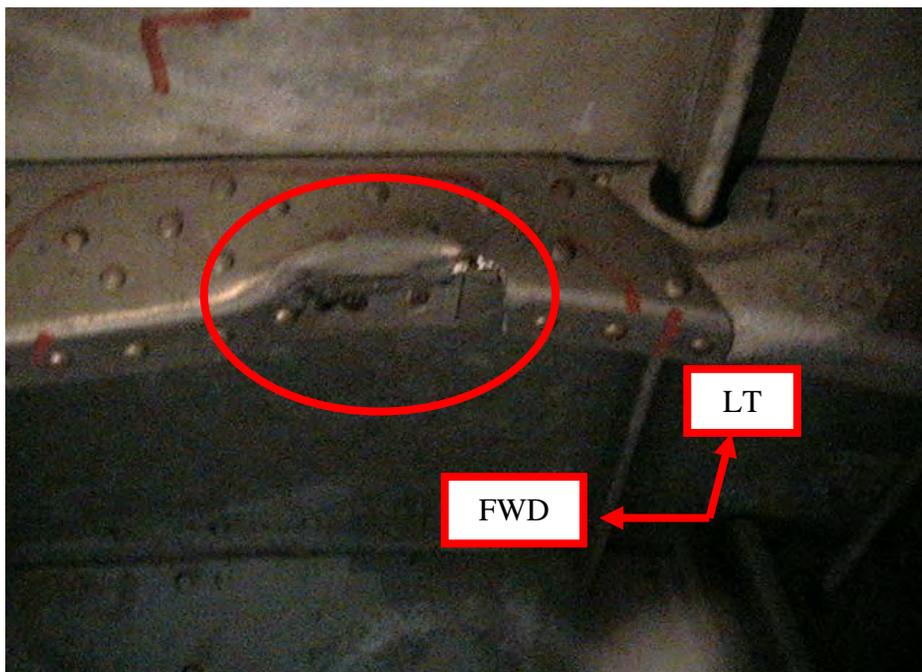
Damaged Left Wing Ribs in the Main Gear Wheel Well FS 150, WL 16, and LWS 39.5 to LWS 49
